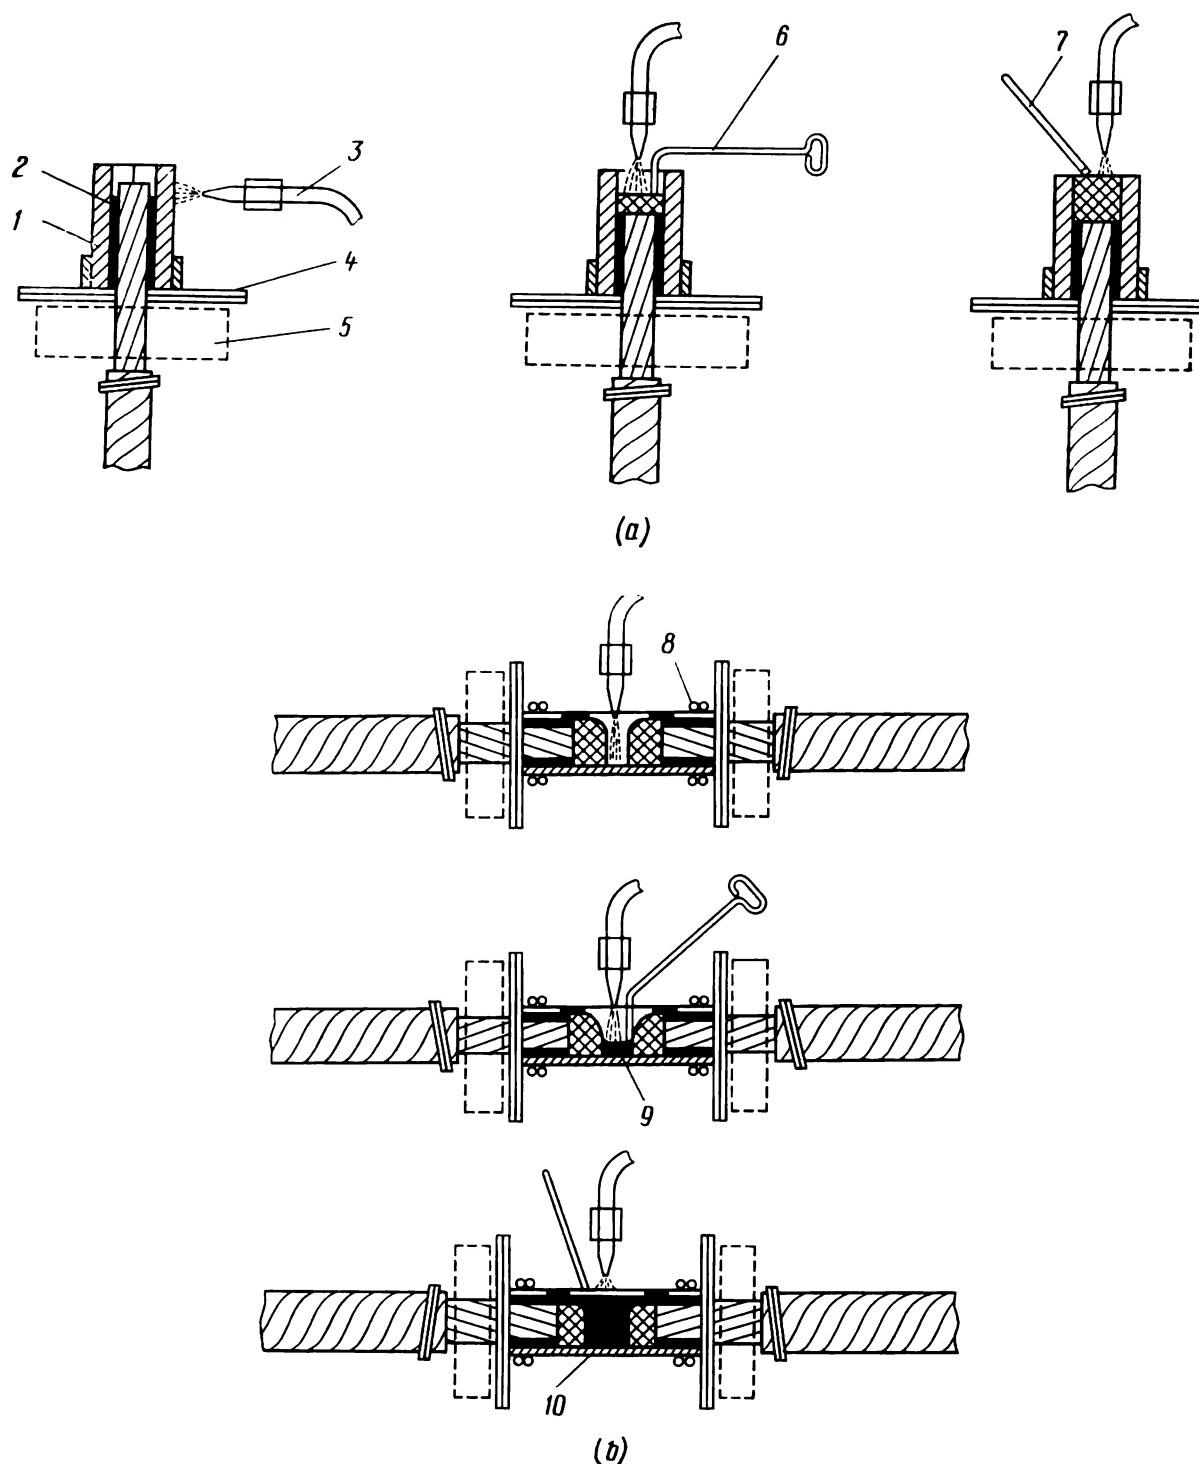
Jointing aluminium conductors by gas welding
